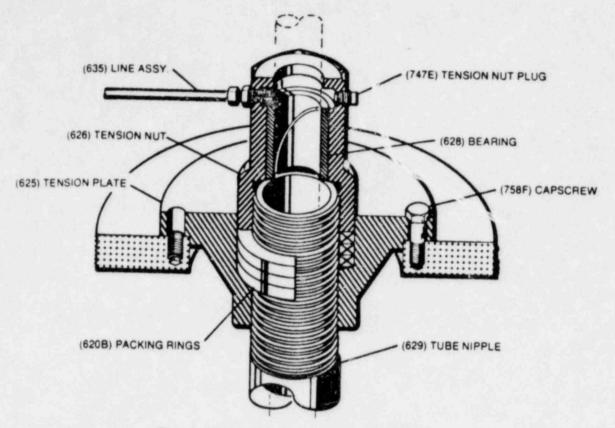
A-2 TENSION PLATE ASSEMBLY (DRIP FEED LUBRICATION)
